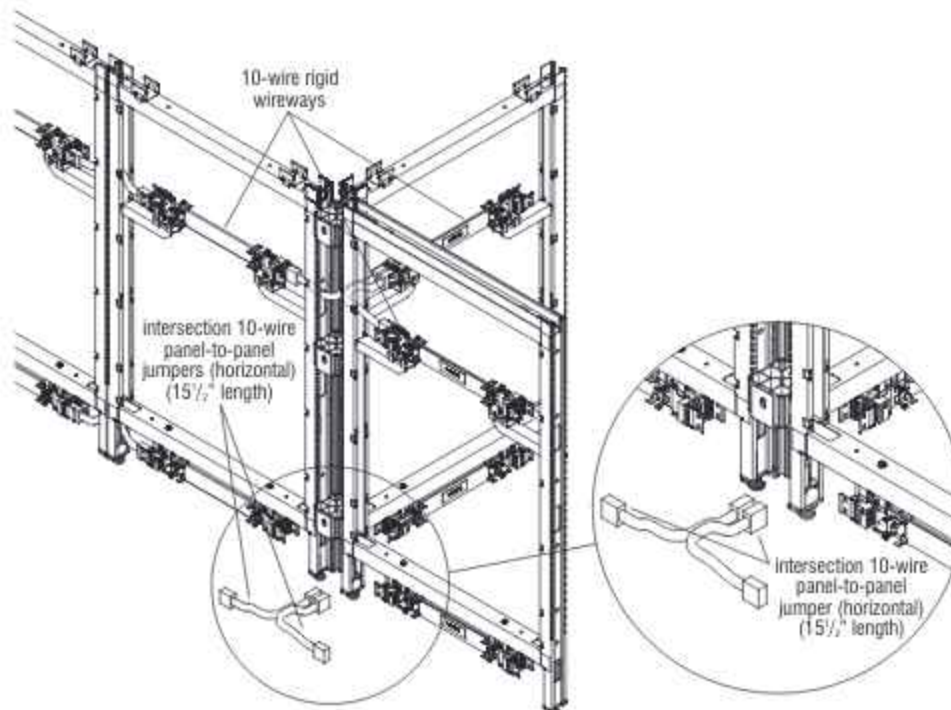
Horizontal Intersection 10-Wire Panel-to-Panel Jumper, 15½" Length
